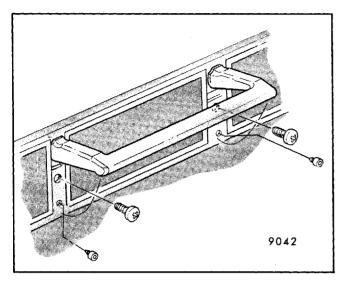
Typical Door Pull Handle Attachment - Buick 4BZ37 and C and Cadillac E and K Styles
